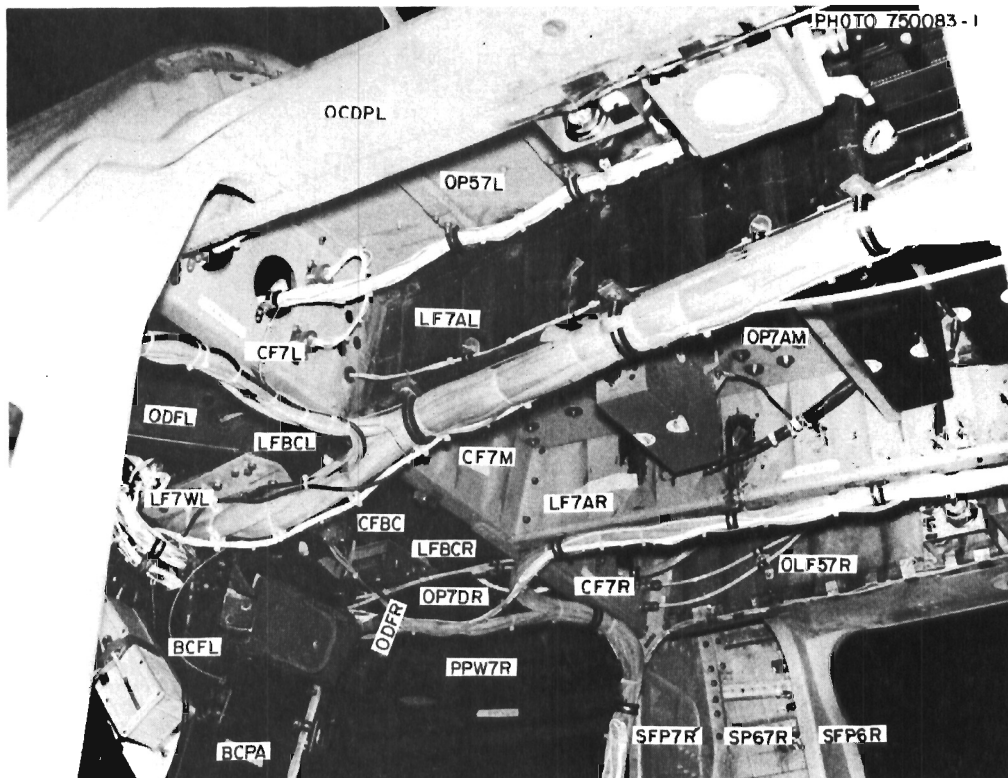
Photograph of ACAP Ceiling Structure - Forward Cabin
